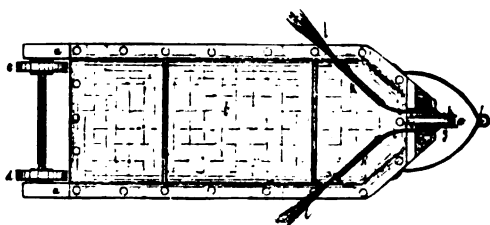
EWING BRUSHING-MACHINE: Top view.
